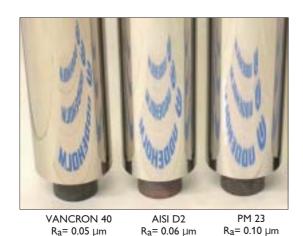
Surface finish after grinding of rolls with WA400 grinding wheel
